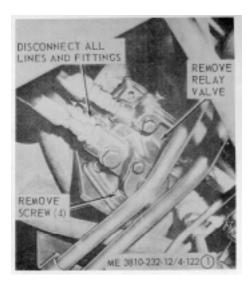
Relay valves, removal and installation. Sheet 1 of 2.
